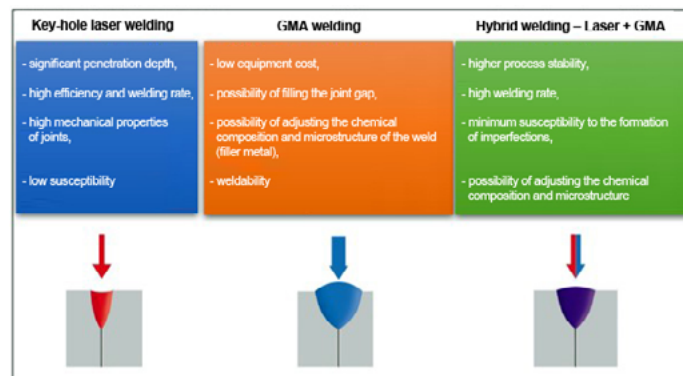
Comparison of advantages of key-hole laser welding, GMA welding and laser hybrid welding (LHW) – laser + GMA, (Fig. 11) [1]
